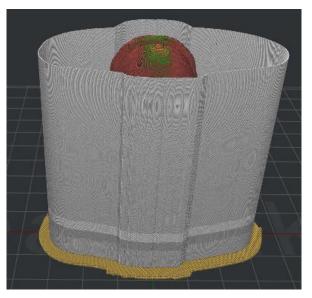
Set "Wipe Wall Type" to be "Vertical".
